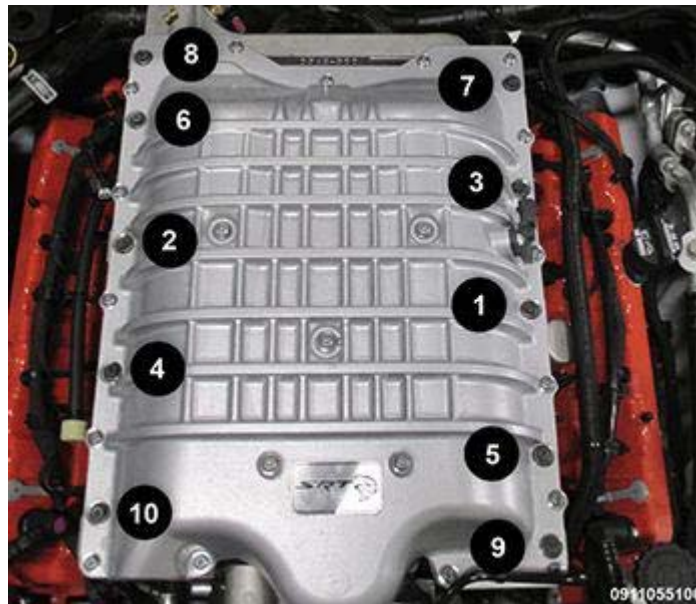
Supercharger To Cylinder Head Retaining Bolts Removal/Tightening Sequence
